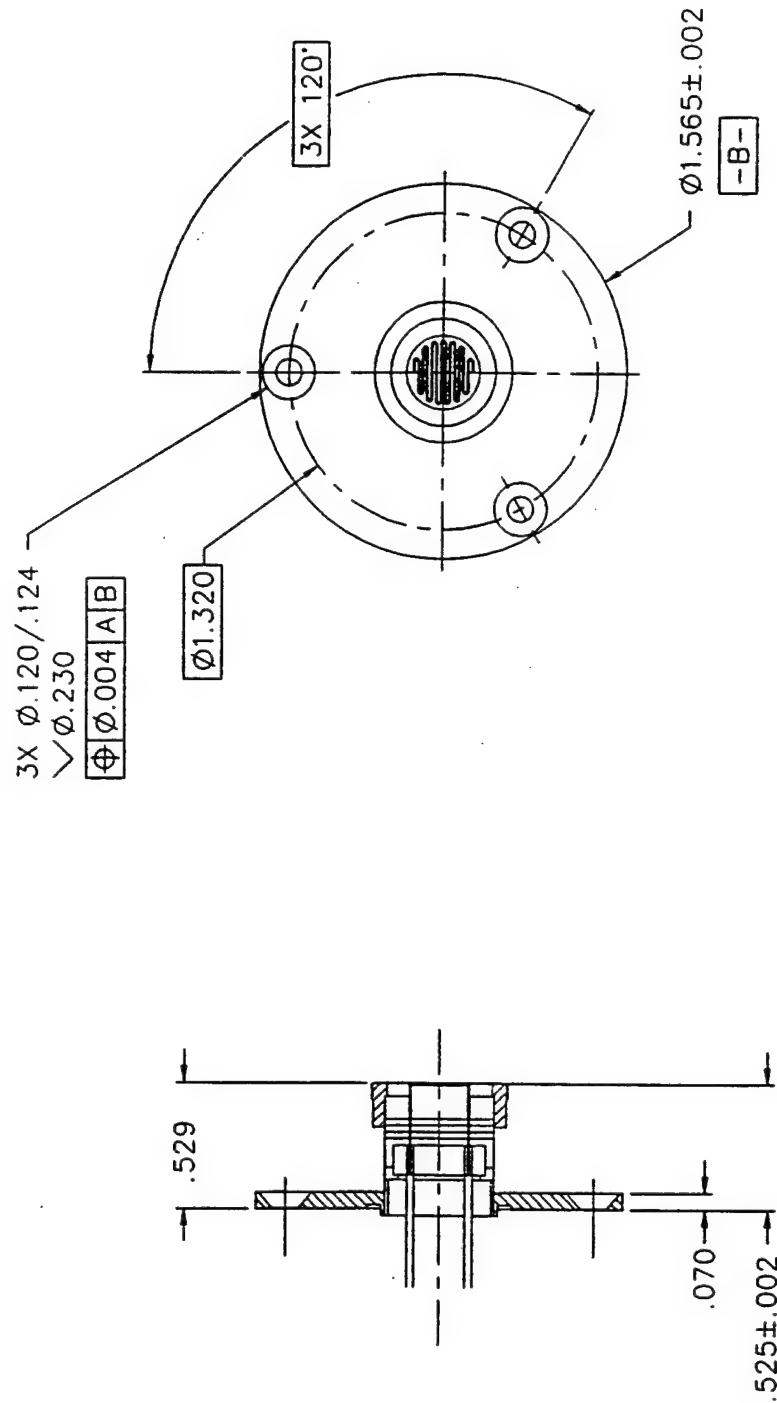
Assembly drawing of the cathode for the hollow cathode plasma contactor.
